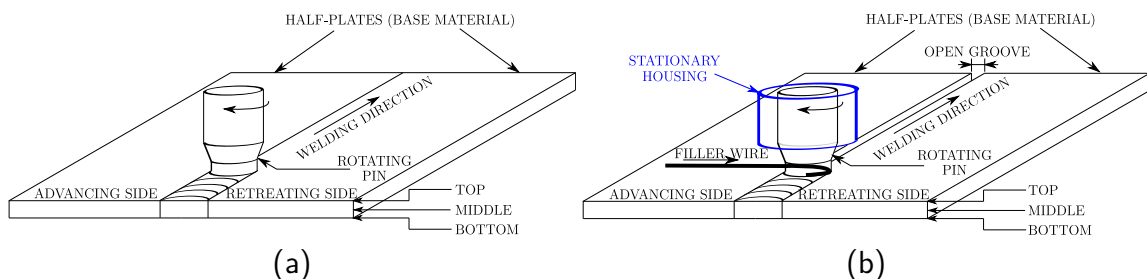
Schemes of the welding the processes. (a) Friction stir welding. (b) Hybrid metal and extrusion bonding, which relies on a continuous extrusions and injection of a filler wire into the open groove to consolidate the weld.
